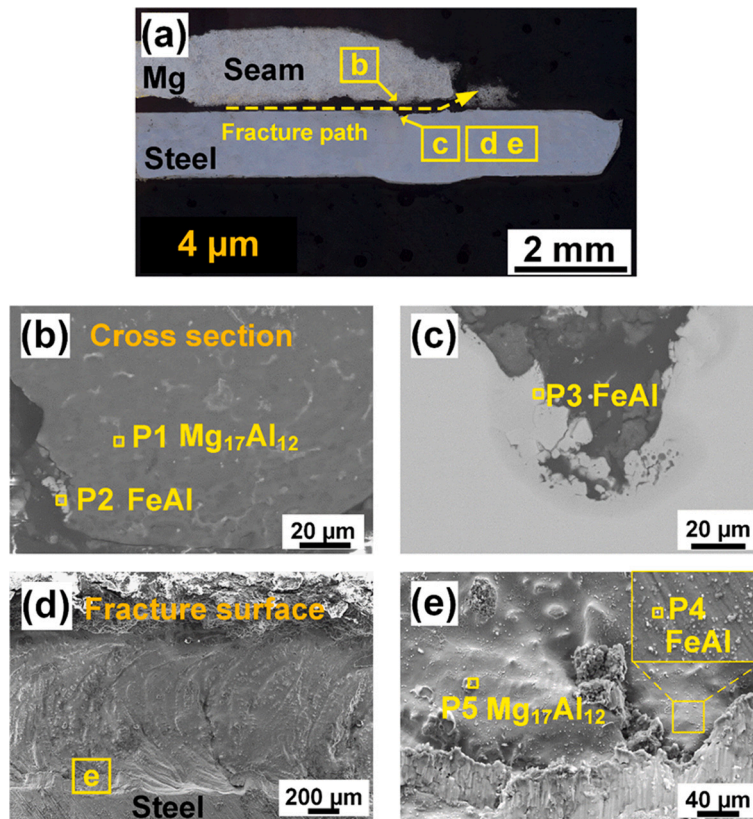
Fracture analysis of magnesium/steel joint with Cu coating thickness of 4 μm : (a) fracture path of the joint; (b) weld side section analysis; (c) steel side section analysis; (d-e) fracture morphology analysis of steel side.
